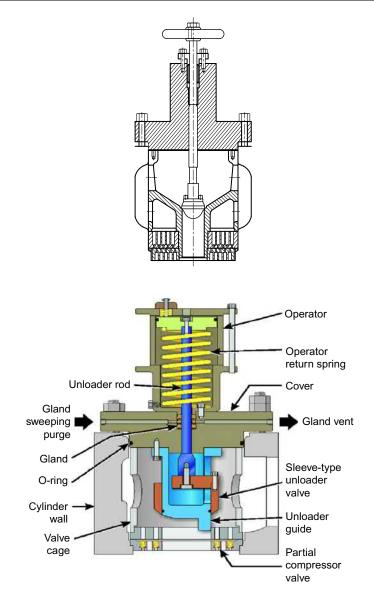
Top*: Sectional of a plug-type suction valve unloader—manual operation; *Bottom*: Sectional view of a Plug-type pneumatic unloader.
